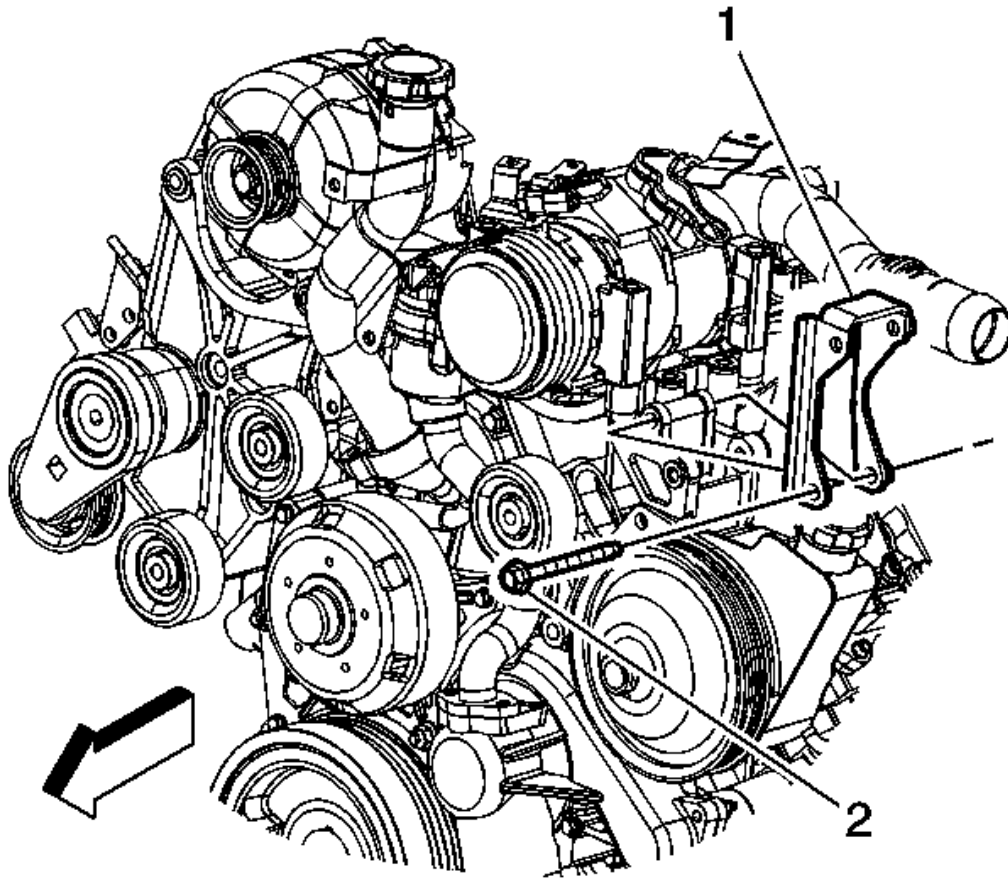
View Of Auxiliary Generator Bracket & Bolt
